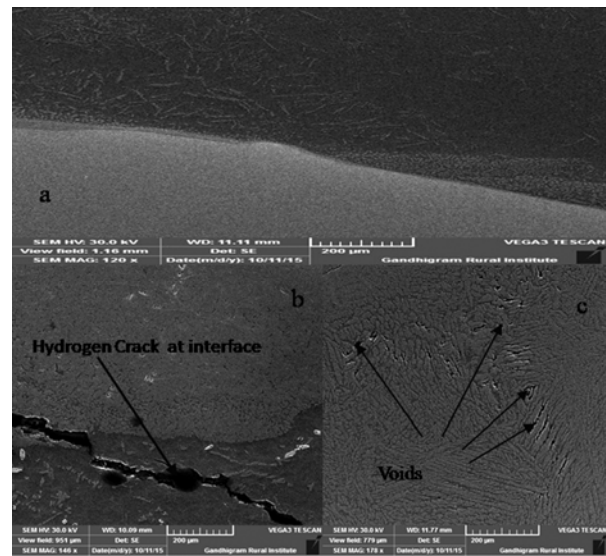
(a) SEM image at interface of weld joint, (b) SEM image at interface for open environment welded joint and (c) SEM Image at welded area for open environment welded joint.
